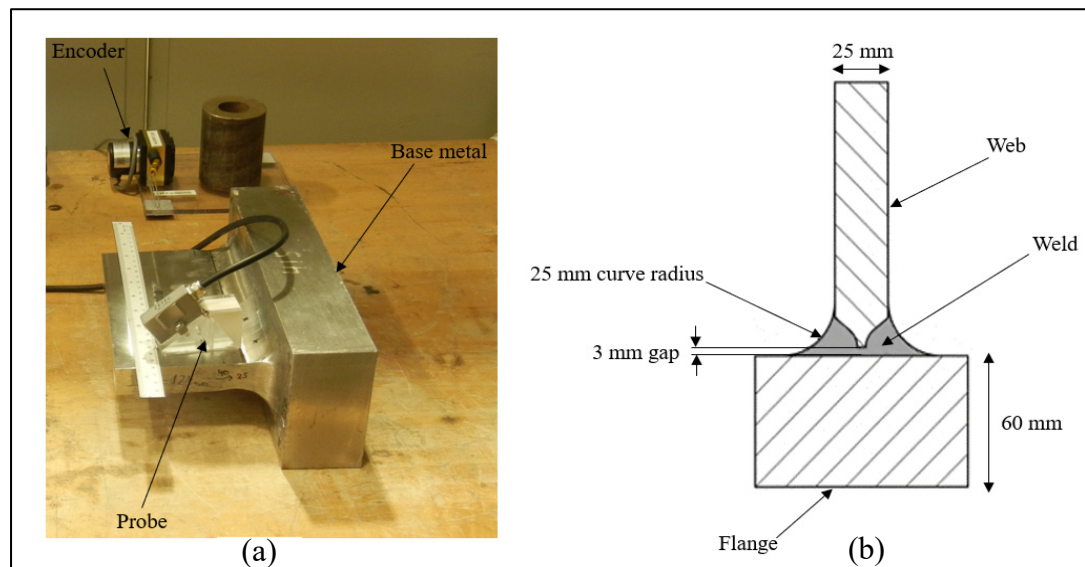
T-joint sample: (a) Mock-up T-joint sample and (b) Manufacturing drawing of T-joint sample
